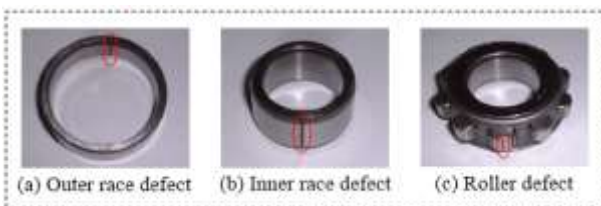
Fault bearing for test: (a) outer race defect, (b) inner race defect, and (c) roller defect
